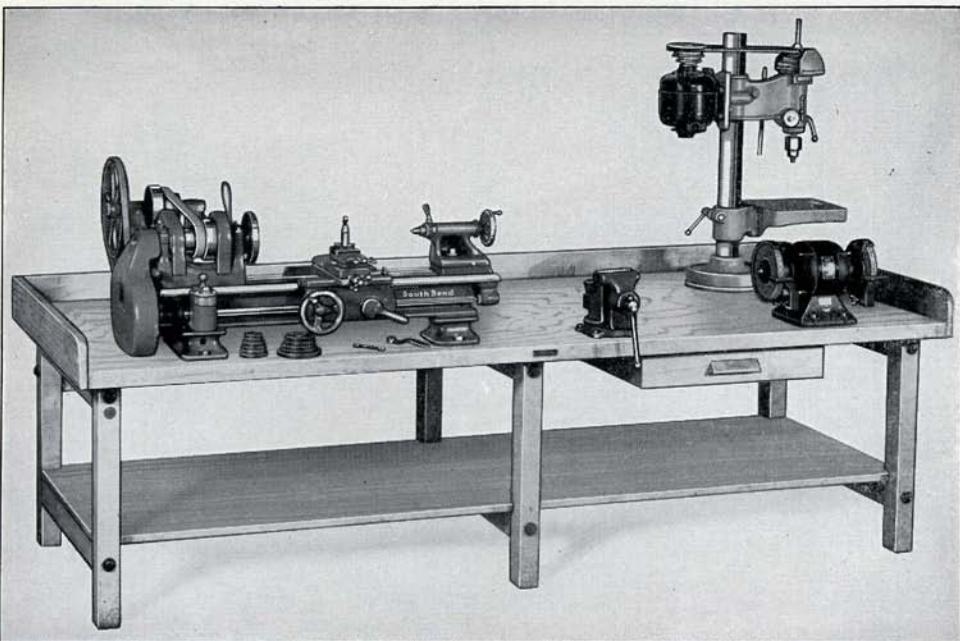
A Complete Motor Driven Machine Shop Unit Mounted on a Bench 40"x96"
